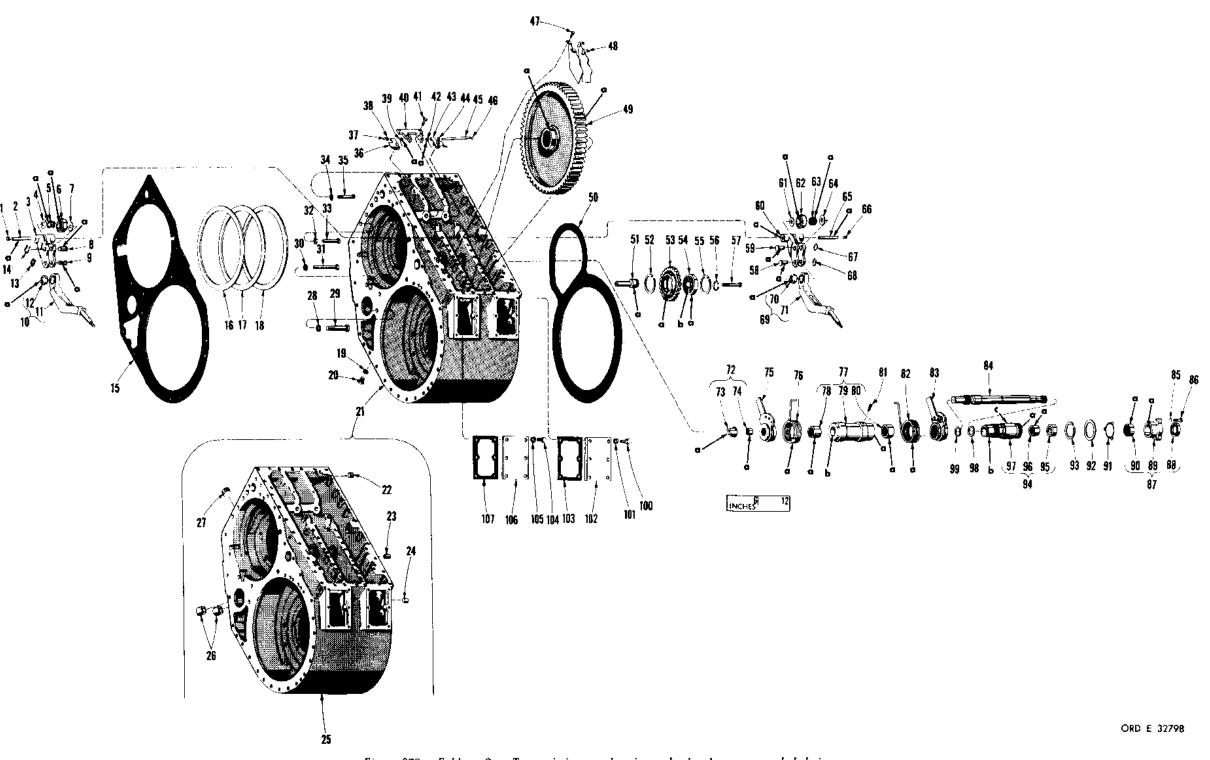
Fold-out 8 — Transmission rear housing and related parts — exploded view
